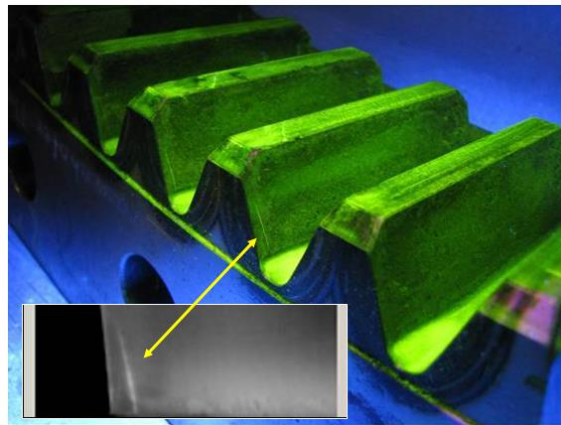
Hardening crack on a gear-tooth detected by induction thermography (small inset) and by magnetic particle testing (large picture)
